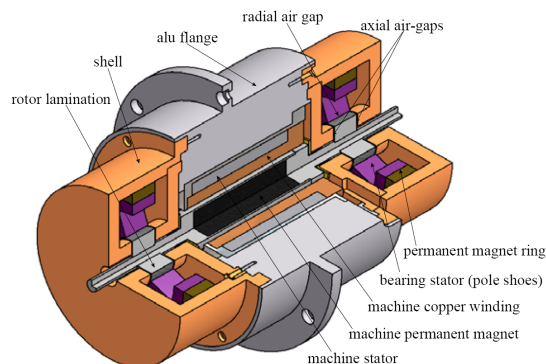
Cut away view of the 1 kW / 500,000 rpm electrical machine.
